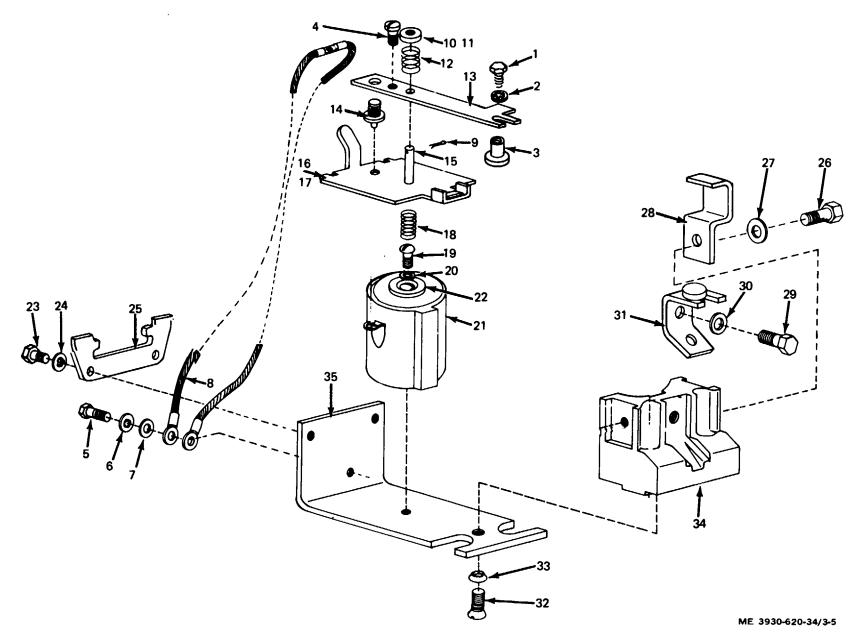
Pump or Emergency cutout contactor, exploded view.
